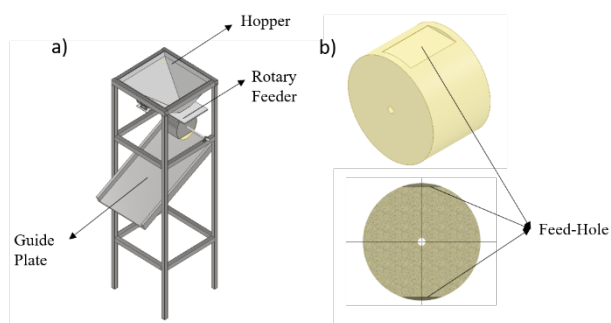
a) Overall feeder design, b) Rotary drum design details
